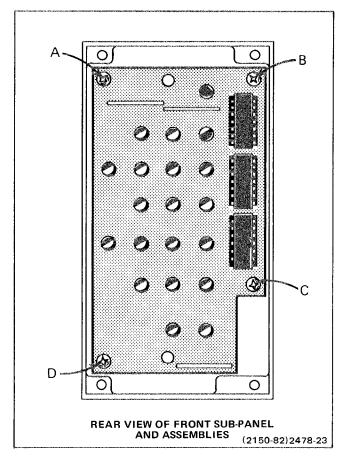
Locations of securing screws on A2 Button Lights circuit board.
